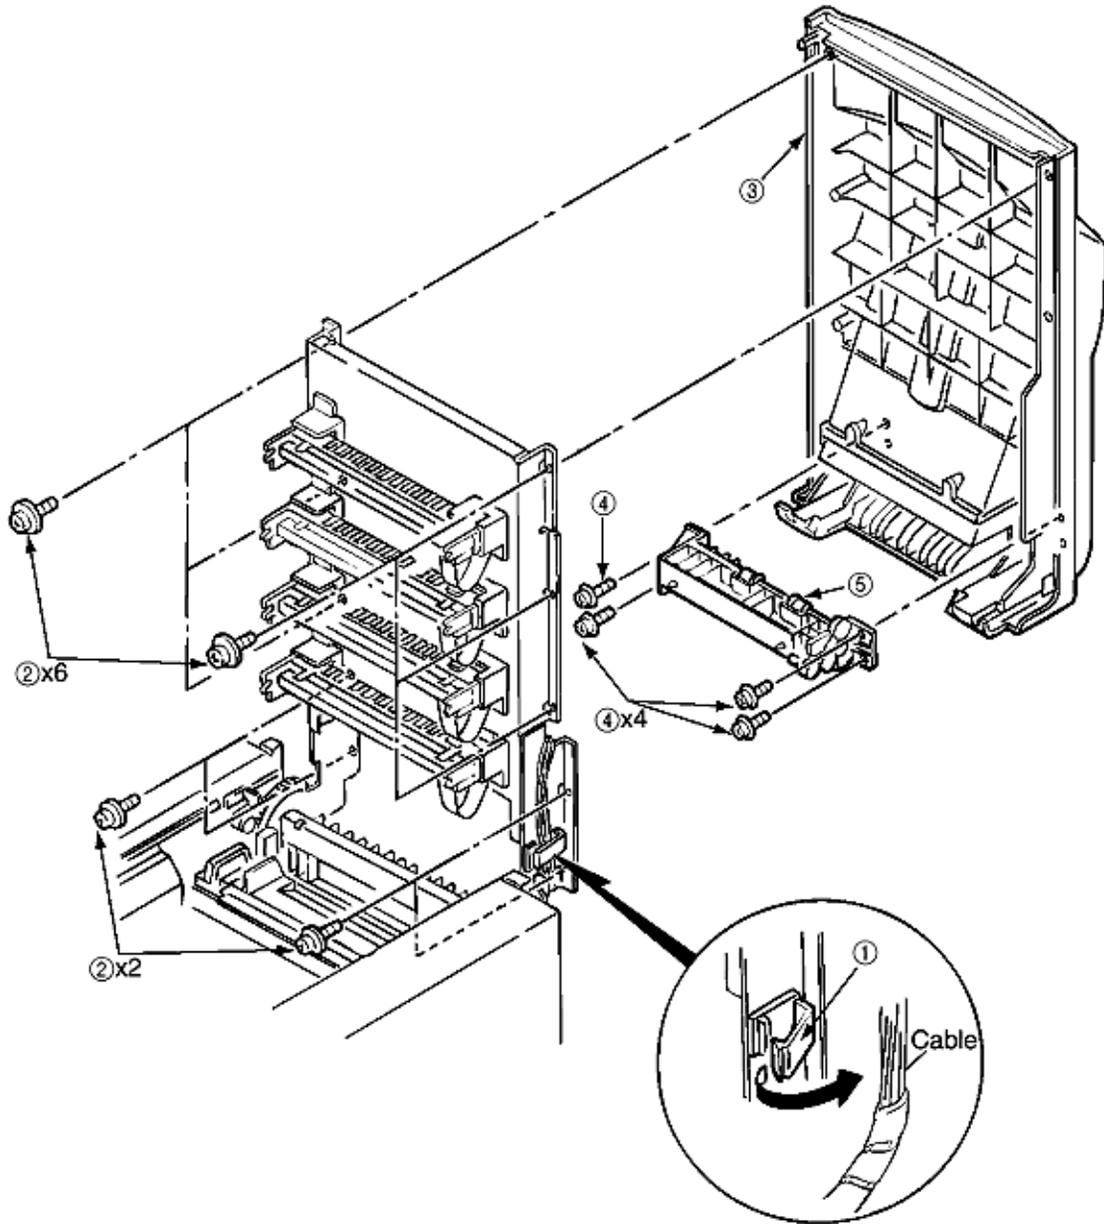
Cover Assy Stacker, Guide Eject FD Assy
